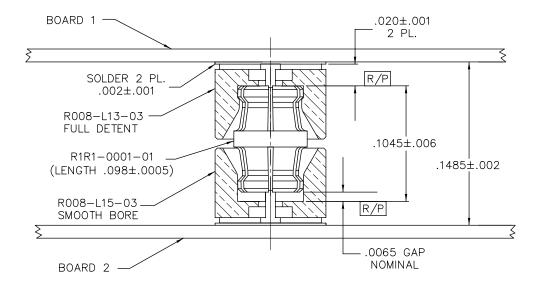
G3PO Board–to–Board Tolerance Analysis
